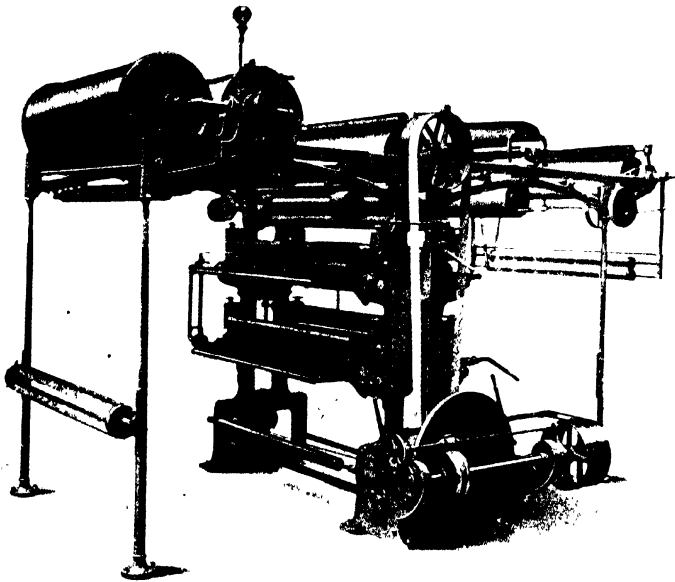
Singeing Machine with Drying Cylinders and Steaming Arrangement.
